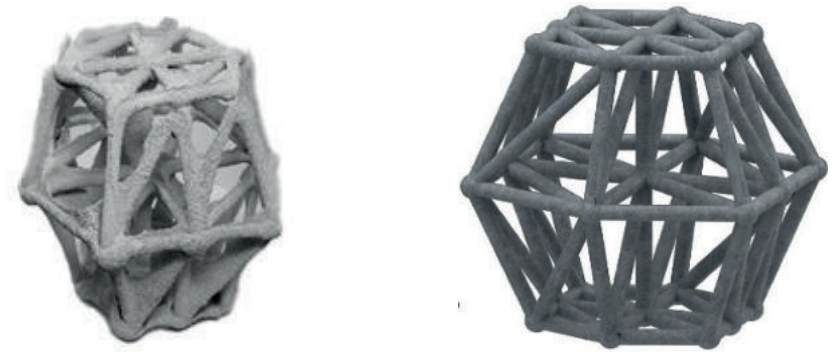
Concrete in Suspension (CiS) demonstrator: design (right) and printed object (left) [4]
